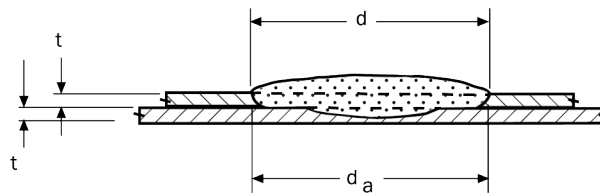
Arc Spot Weld – Sheet to Sheet
